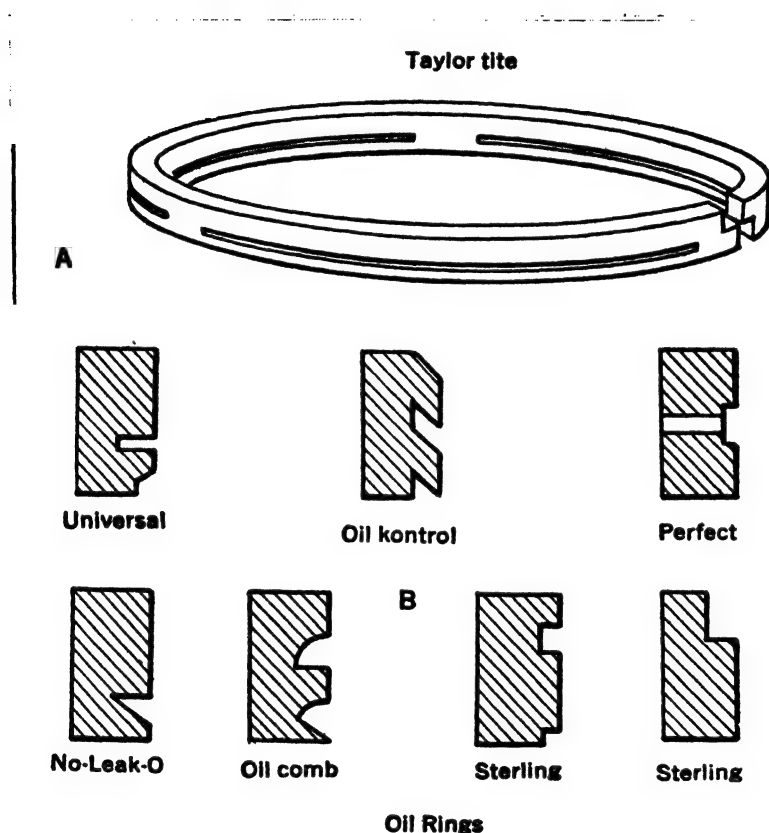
Ring With Oil Control Slots Shown at A. Various Systems of Machining Oil Control Grooves in the Face of Rings Shown at B.
